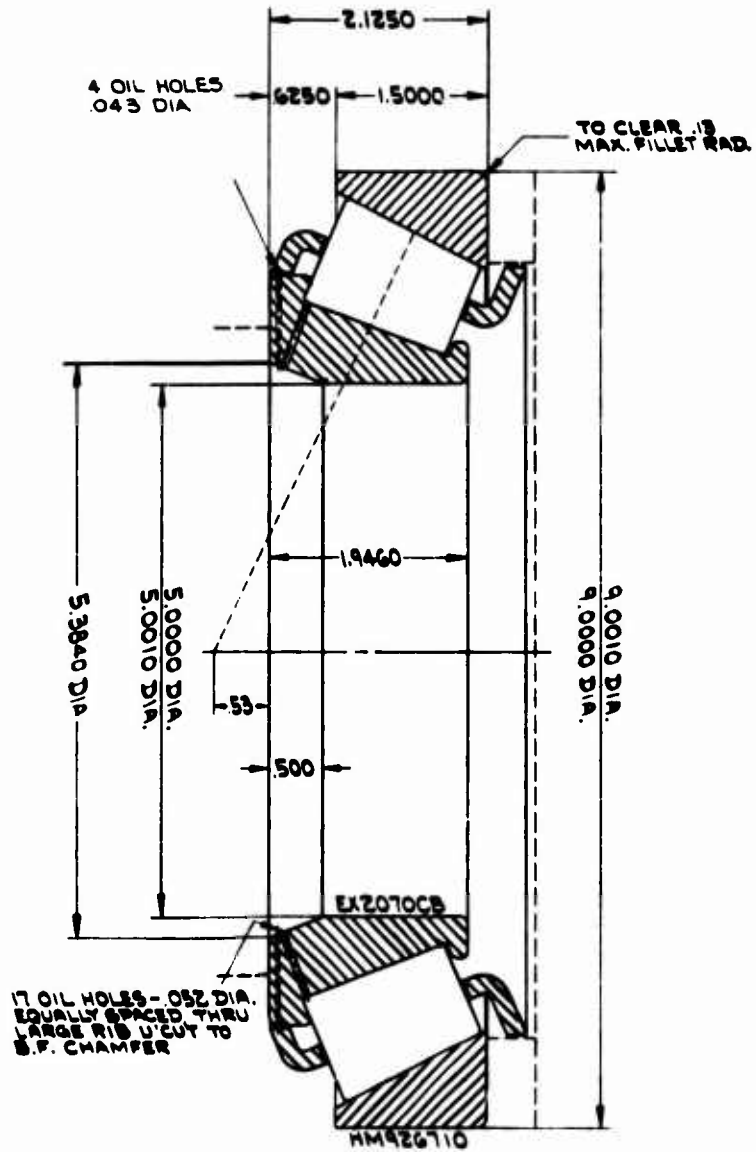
HM926700-Series Bearing Assembly - 17 Oil Holes.
